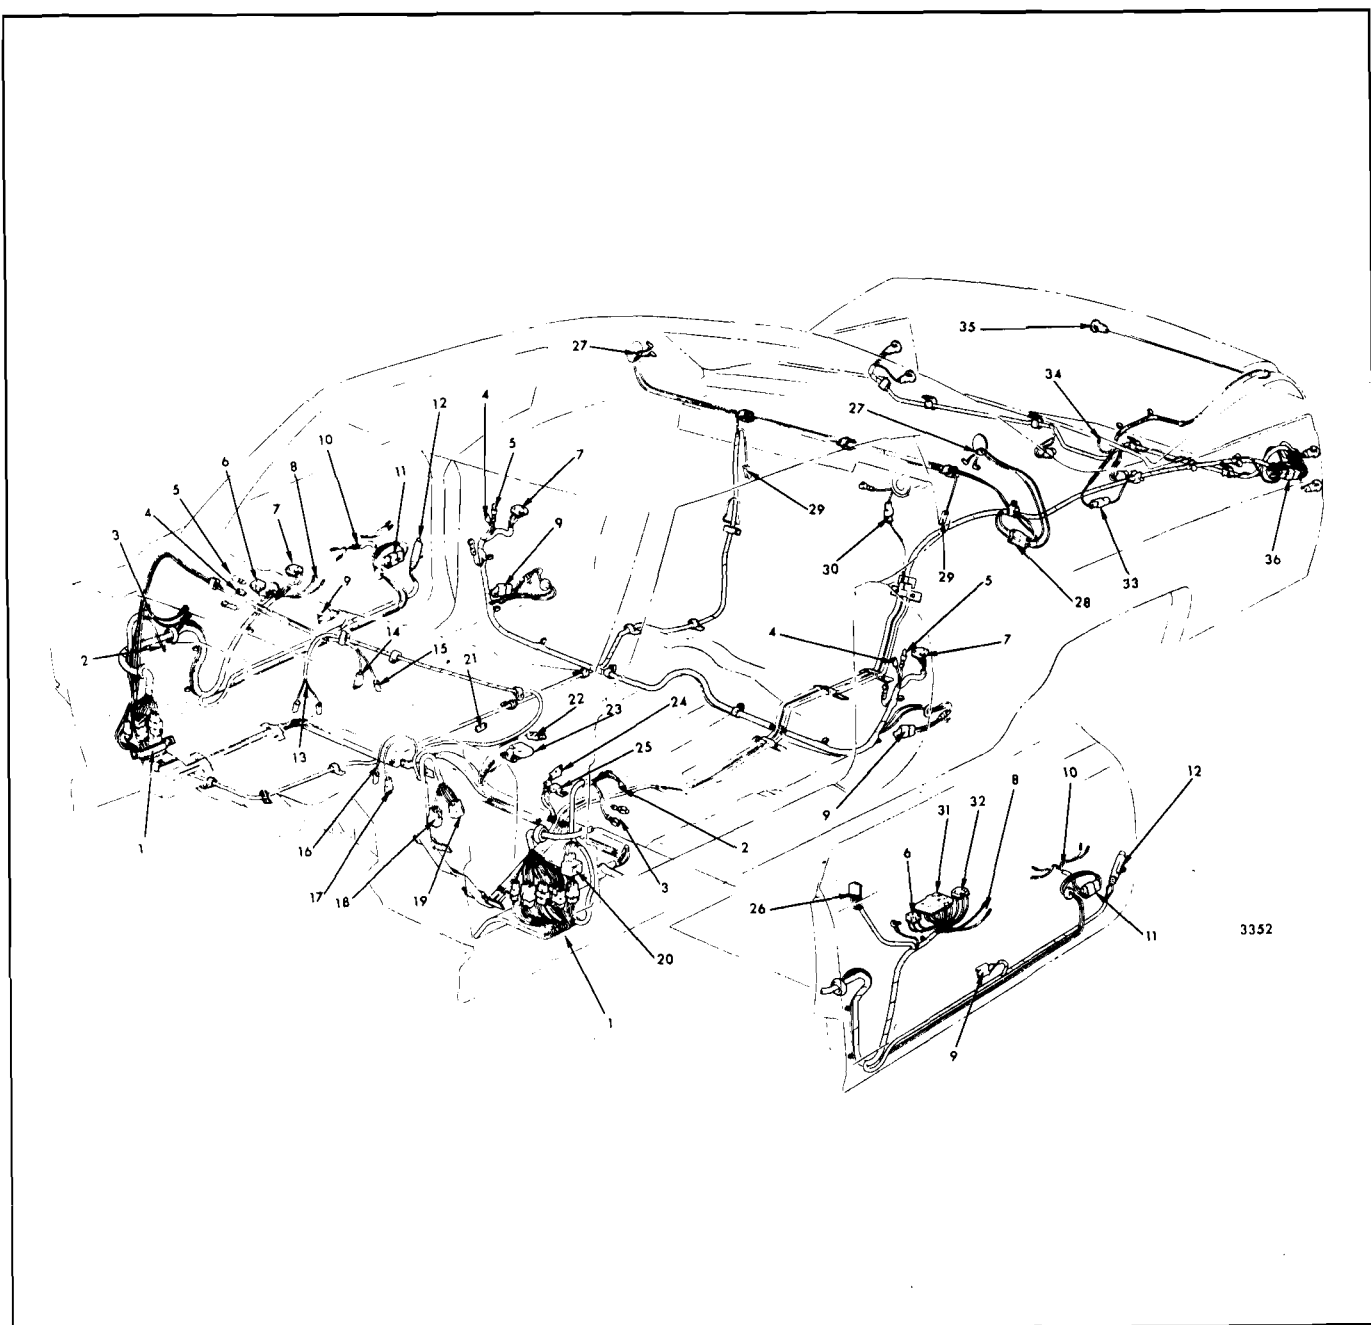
Cadillac "C-47" Style Body Wire Routing (Typical)
